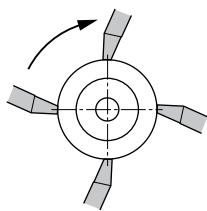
Checking the axial alignment with a calliper gauge - circumferential check
